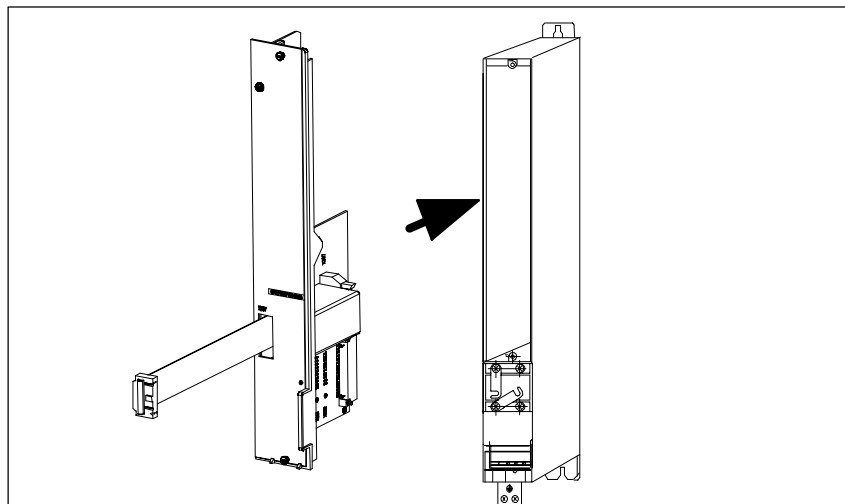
Mounting the left-hand axis expansion plug-in unit in the power section with the CCU3 (X307)
